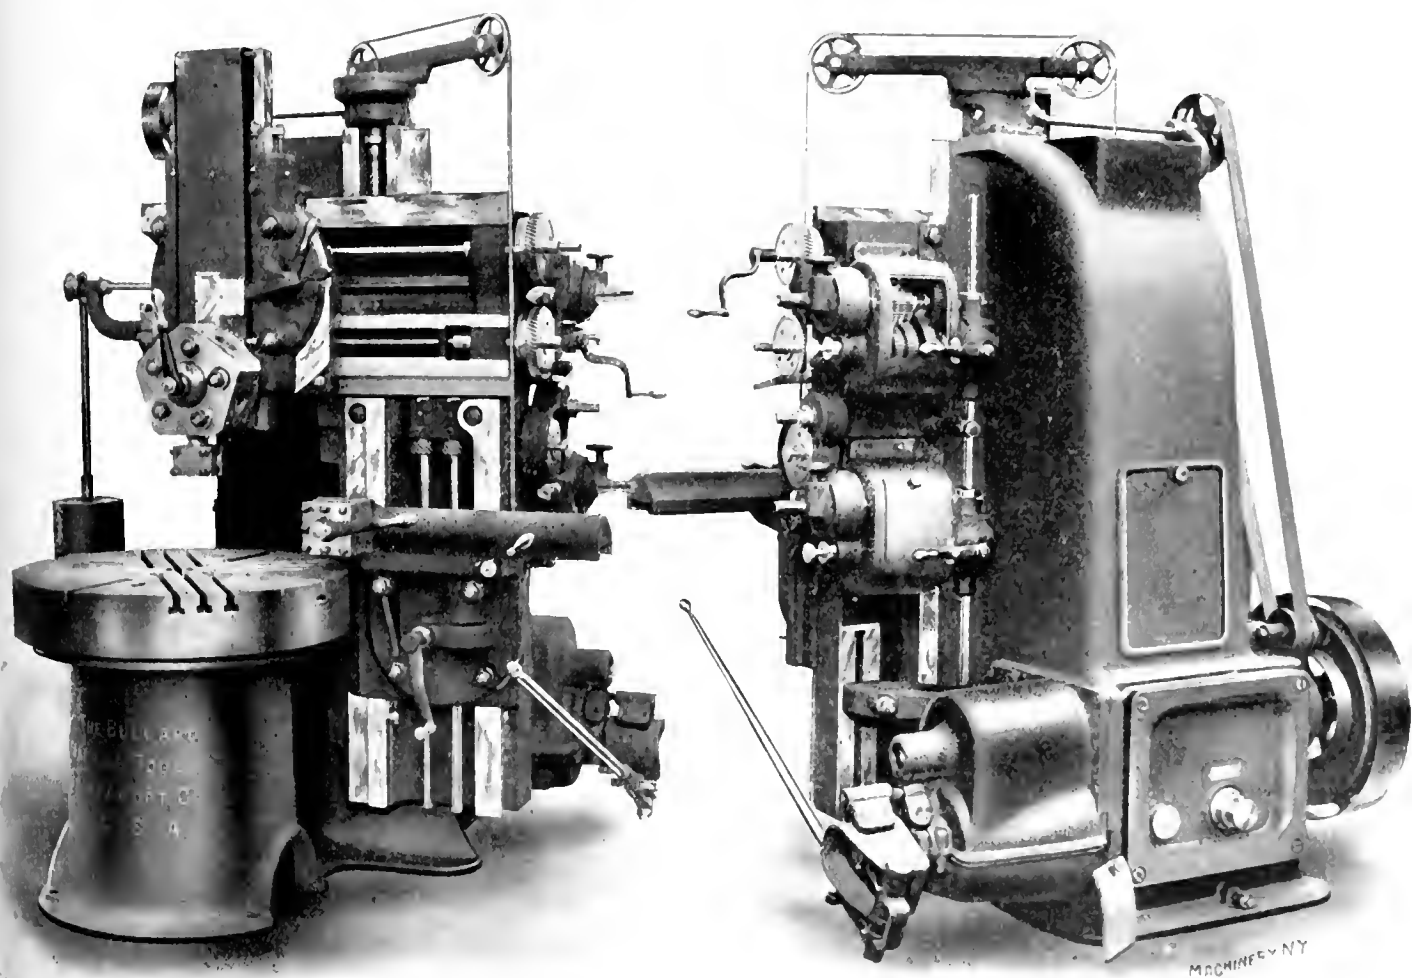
A New Bullard Boring and Turning Mill which the Manufacturers style a "Vertical Turret Lathe"
